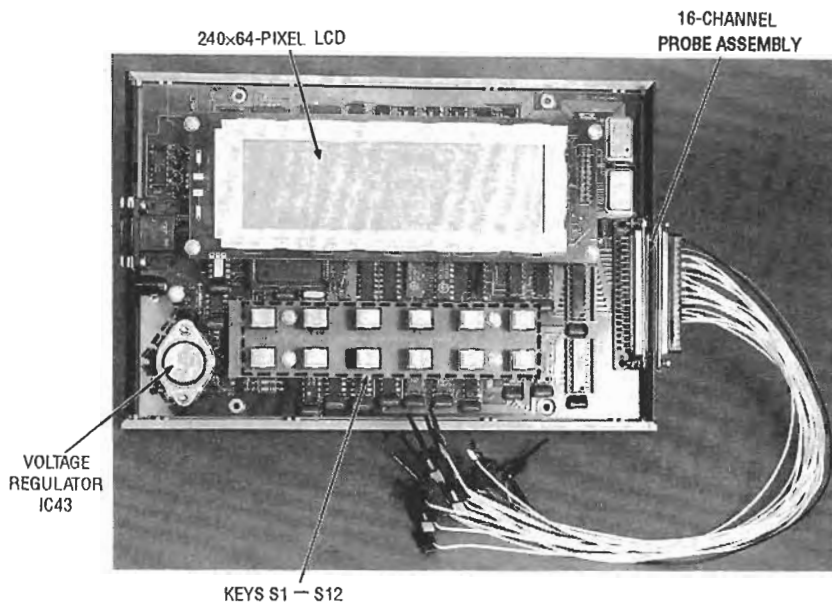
INTERNAL PHOTO OF the logic analyzer. The main PC board has four layers: two signal layers, one power, and one ground plane. Wire wrap and point-to-point soldering techniques cannot be used because of extremely high-speed logic.
